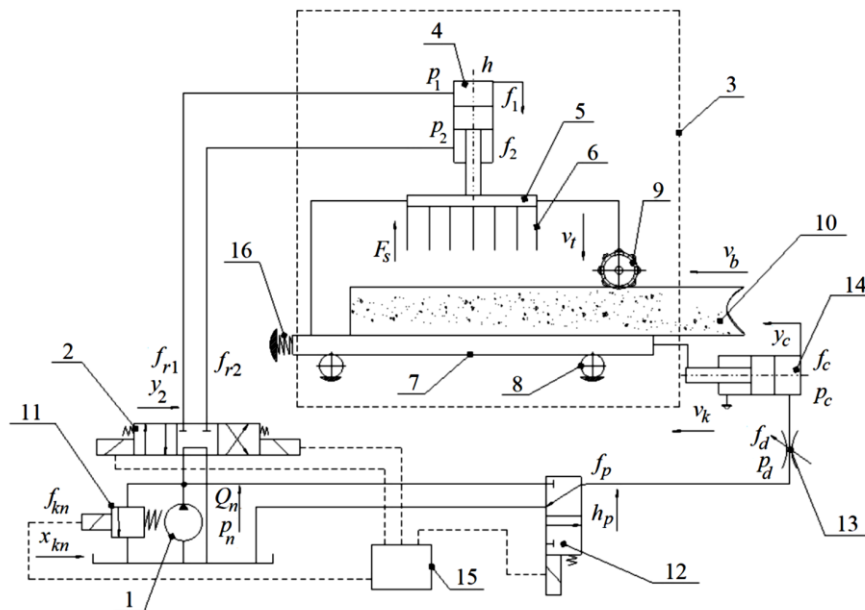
Hydraulic scheme of installation for forming brick workpieces
